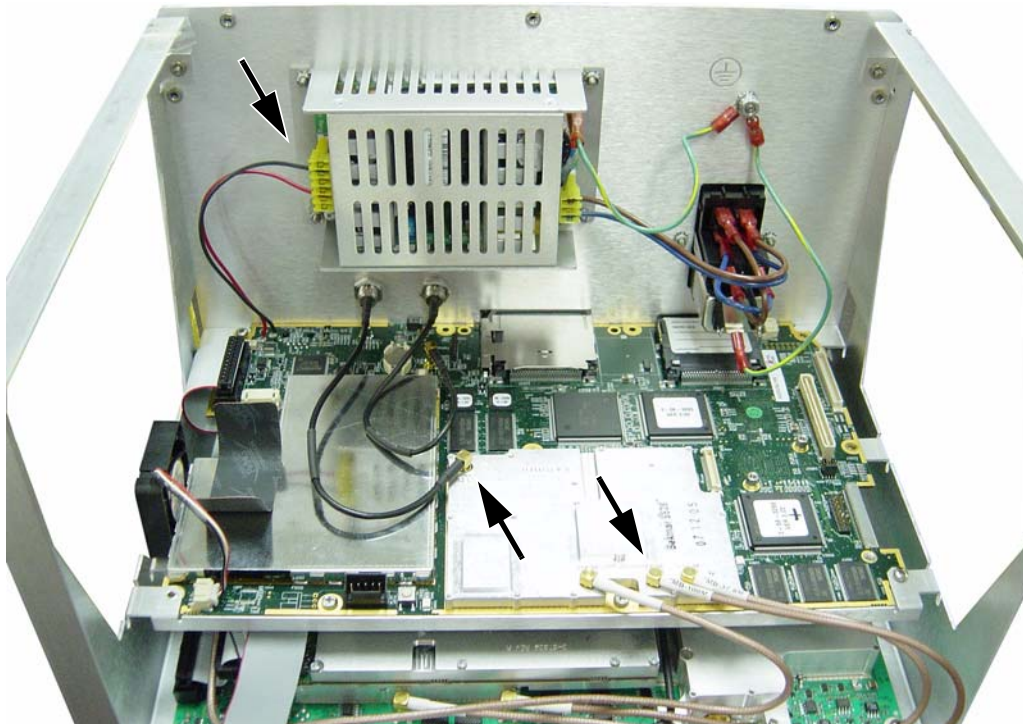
MCX Connectors from SPA PCB to Main PCB
